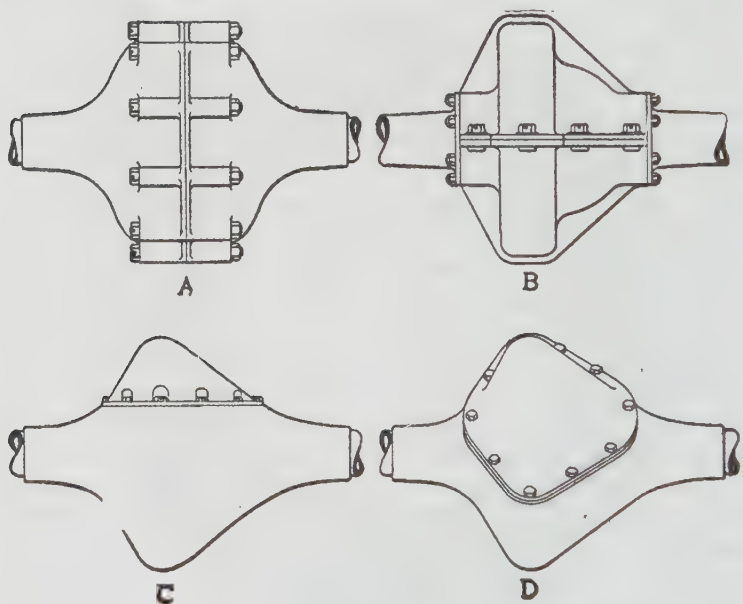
TYPES OF DRIVING GEAR HOUSINGS.
